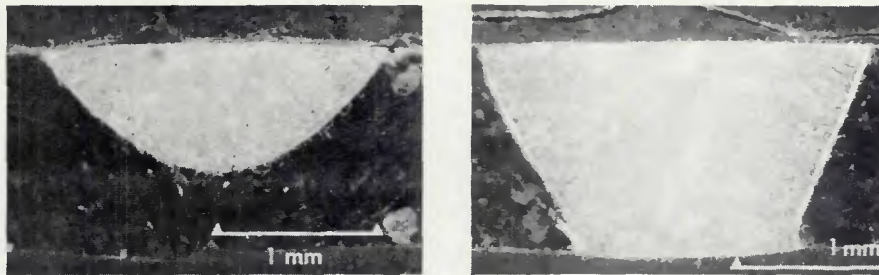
Welded butt joints on 304L stainless steel with (left) pure argon and (right) argon plus 700 ppm SO_2 shielding gases. All other welding variables were unchanged; the SO_2 was simply turned off when the weld was partially completed. Current—47 A; travel speed—200 mm/min
